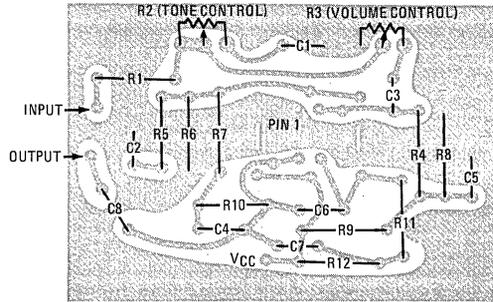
PRINTED CIRCUIT BOARD (Foil Side)
